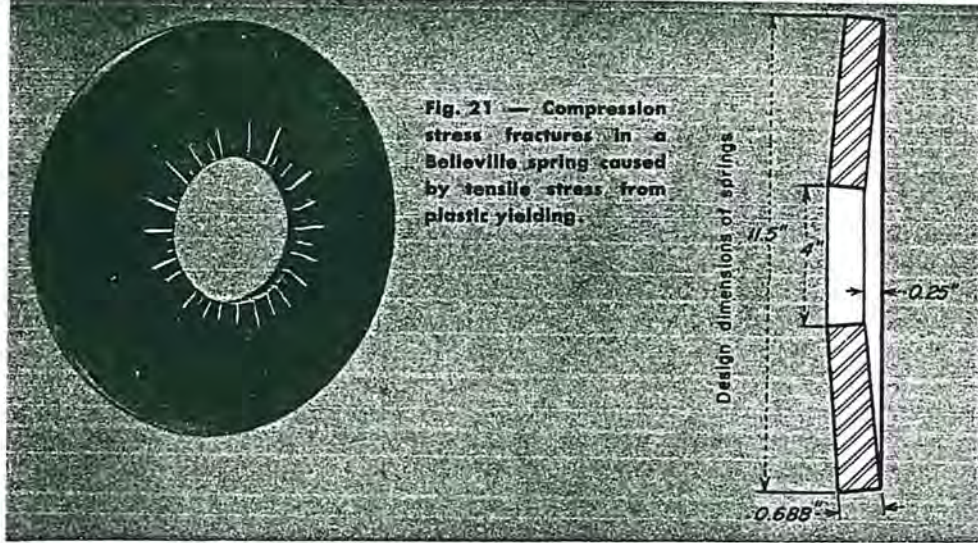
Compression stress fractures in a Belleville spring caused by tensile stress from plastic yielding.
